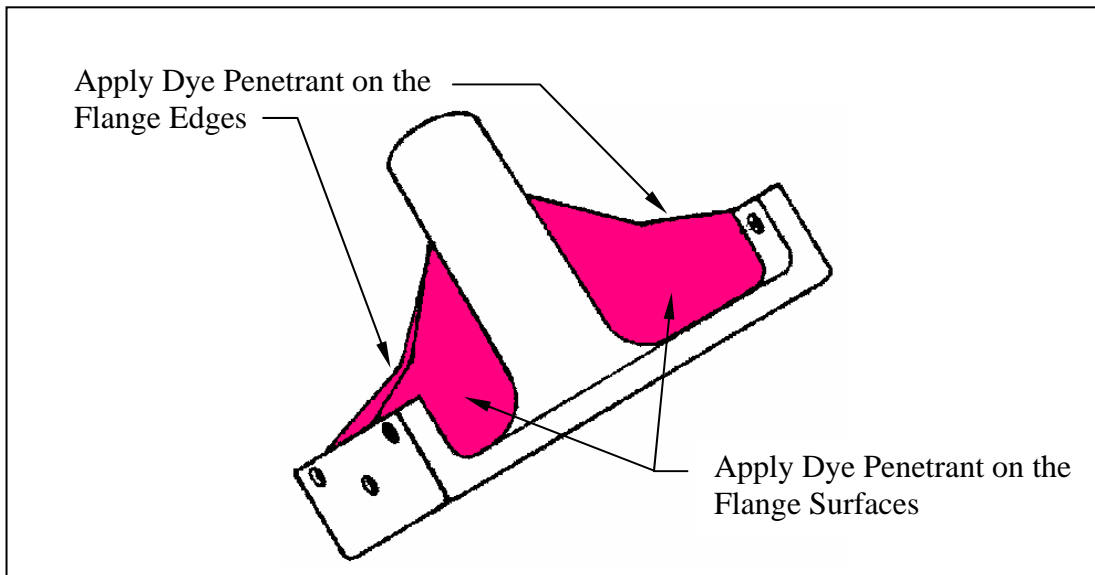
Idler Yoke Dye Penetrant Inspection Areas
